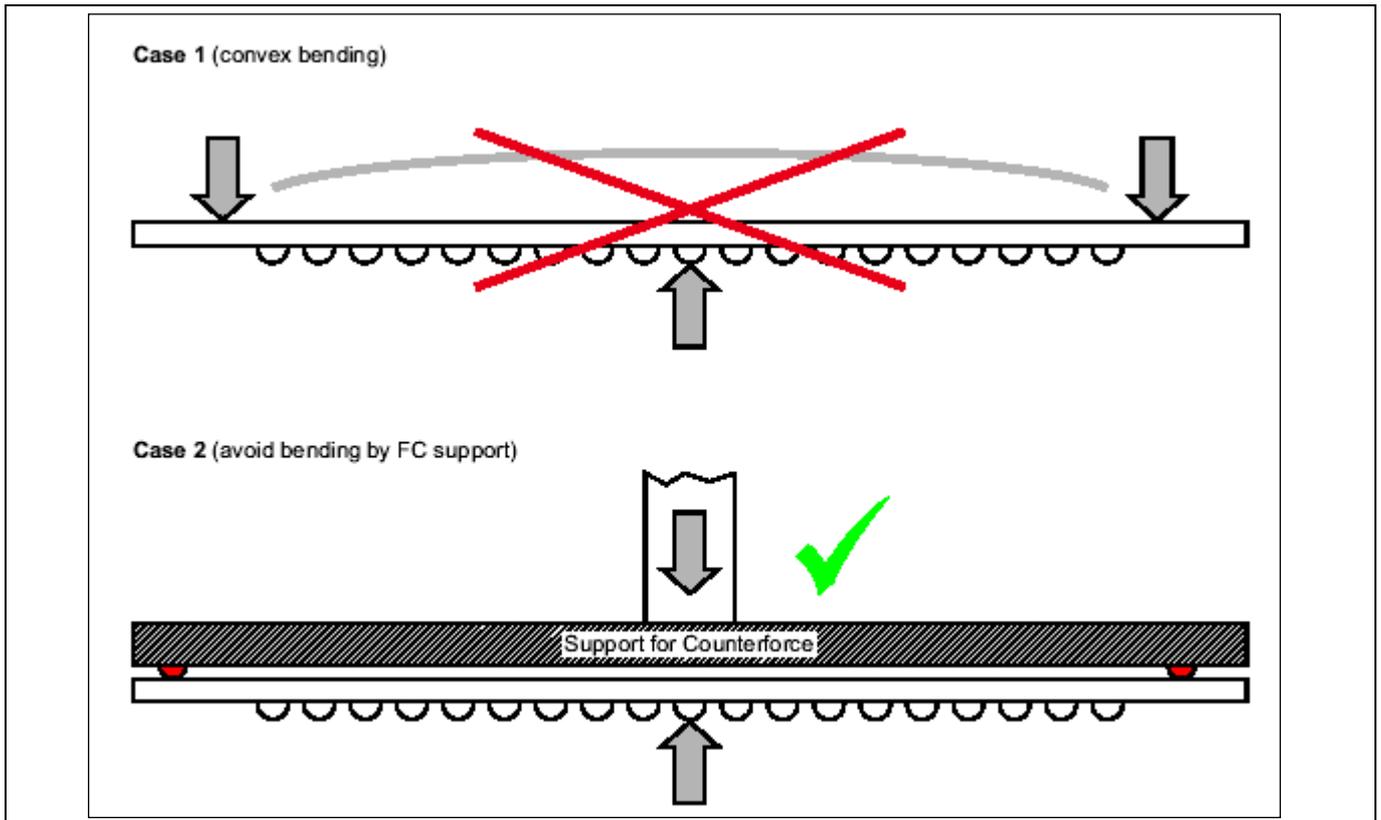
Case 1 shows bending stress applied on Wafer-Level Package by insufficient support. Case 2 shows a nozzle supporting the package and applying a counterforce.
